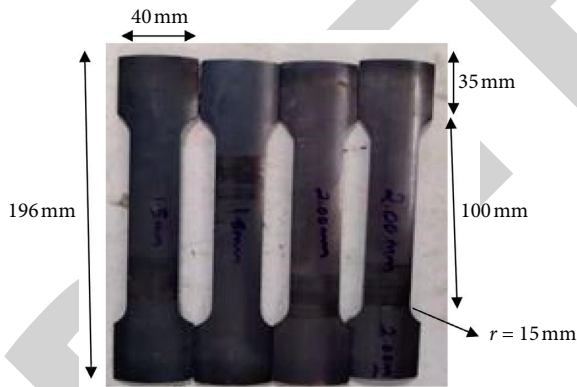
Coupon test specimen dimensions as per ASTM.
